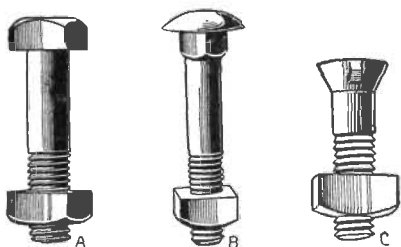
Types of bolts: A, machine bolt with nut; B, carriage bolt with nut; C, plow bolt with nut.
